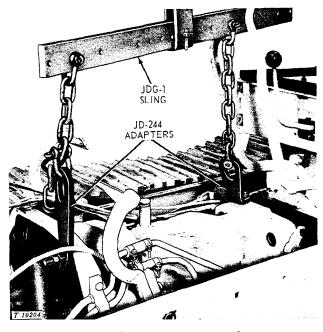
Removing Reverser Case (or Clutch Housing)
